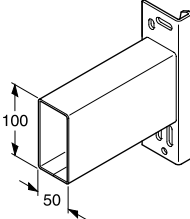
Traverse cross-sections of the ITDL / IT traverses (all dimensions in mm, the middle weld-on position is shown)
